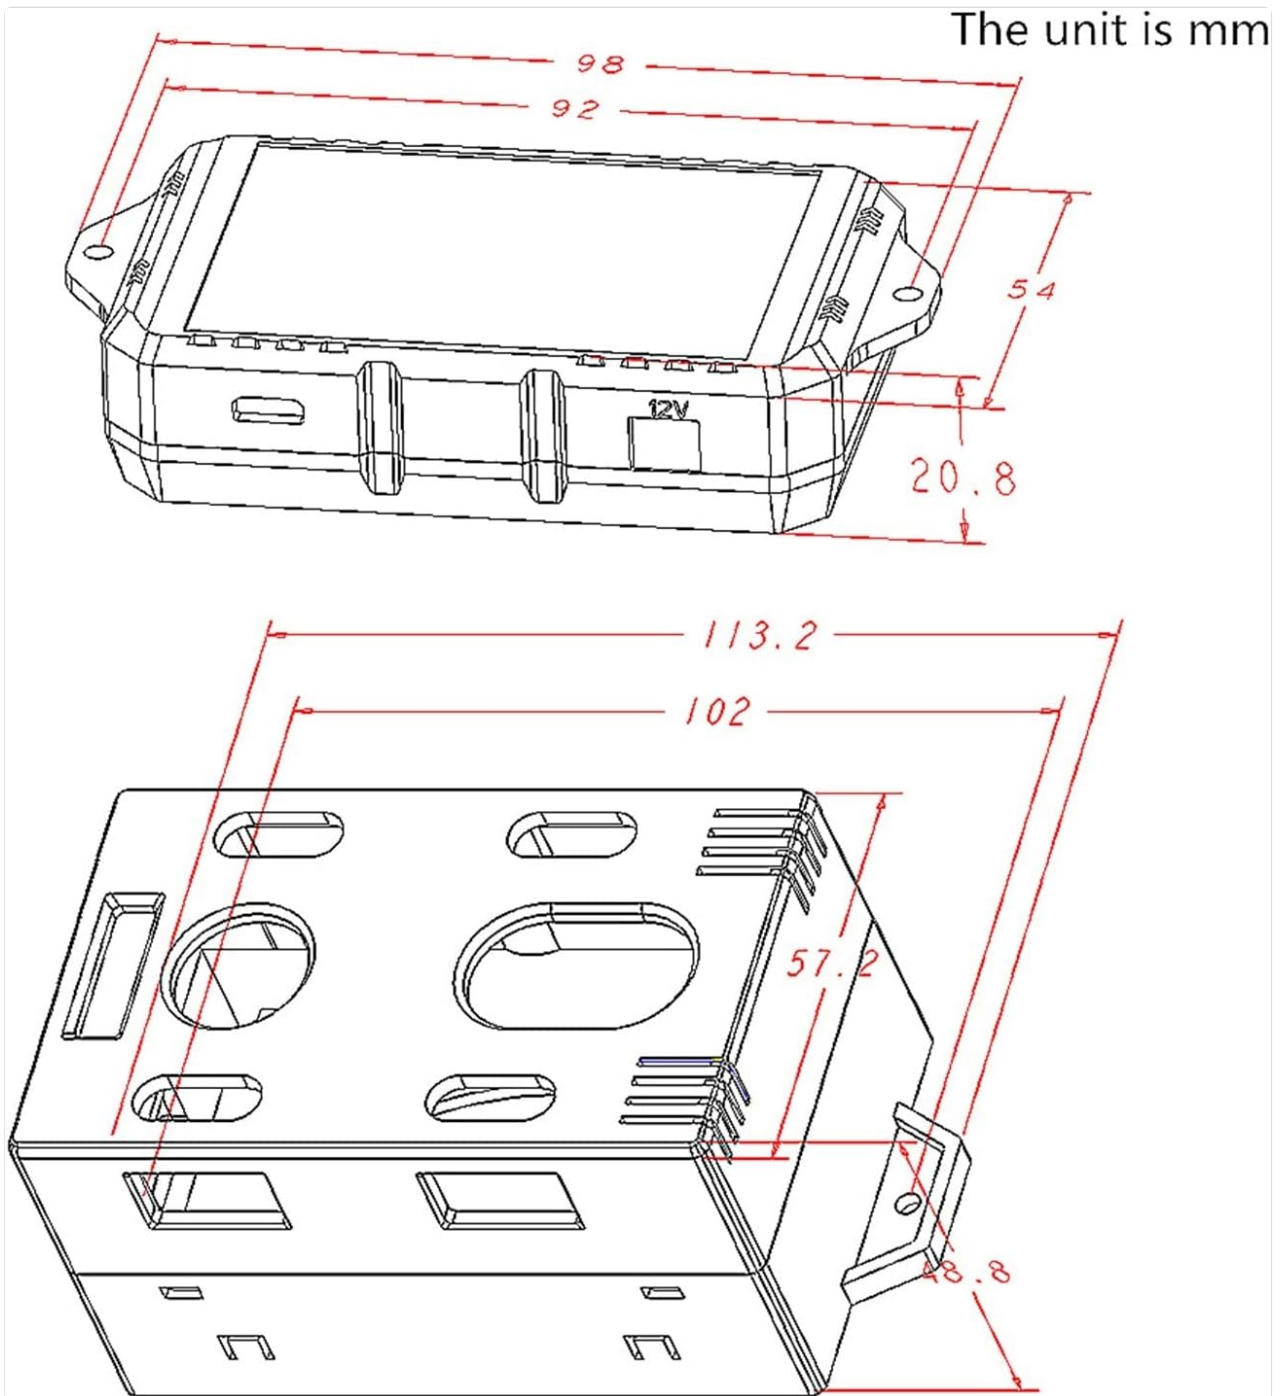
Dimensional Drawing. This illustration provides the physical dimensions of both the display and measurement modules in millimeters, aiding in installation planning.
